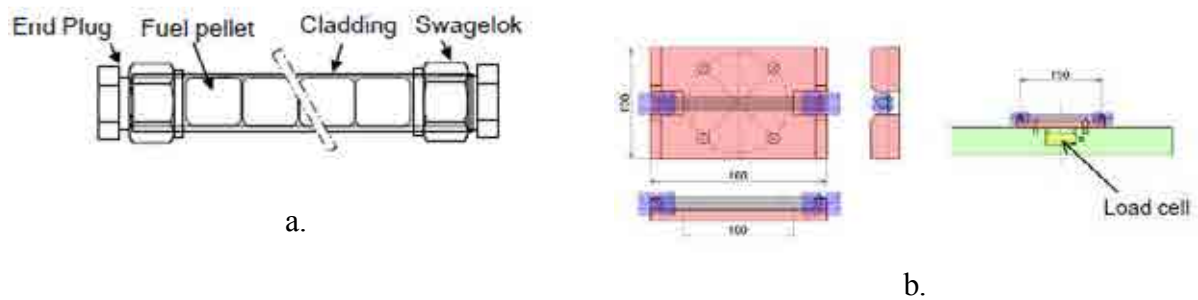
Specimen setup (a.) and holding device for lateral load impact tests (b.); dimensions in mm.
